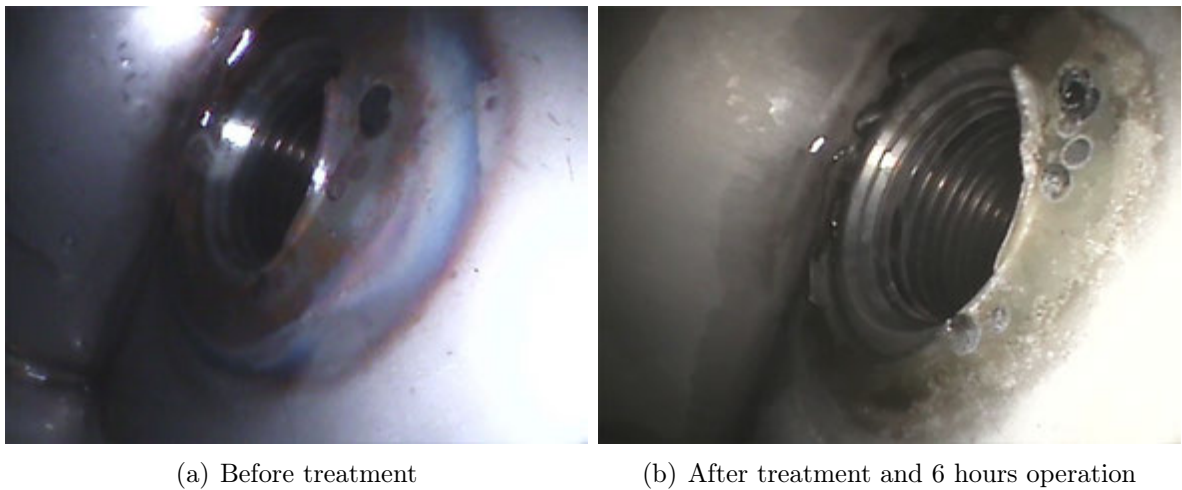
Stainless steel welds inside expansion tank before and after pickling and passivating
